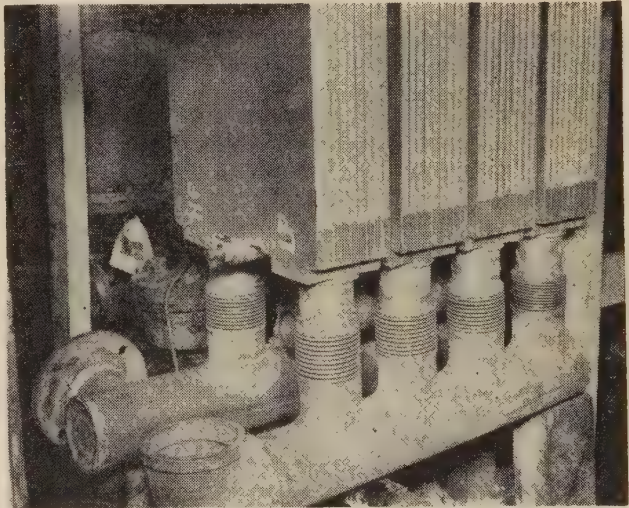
ASSEMBLY OF IMPROVED DESIGN OF SLAB HEAT EXCHANGERS
